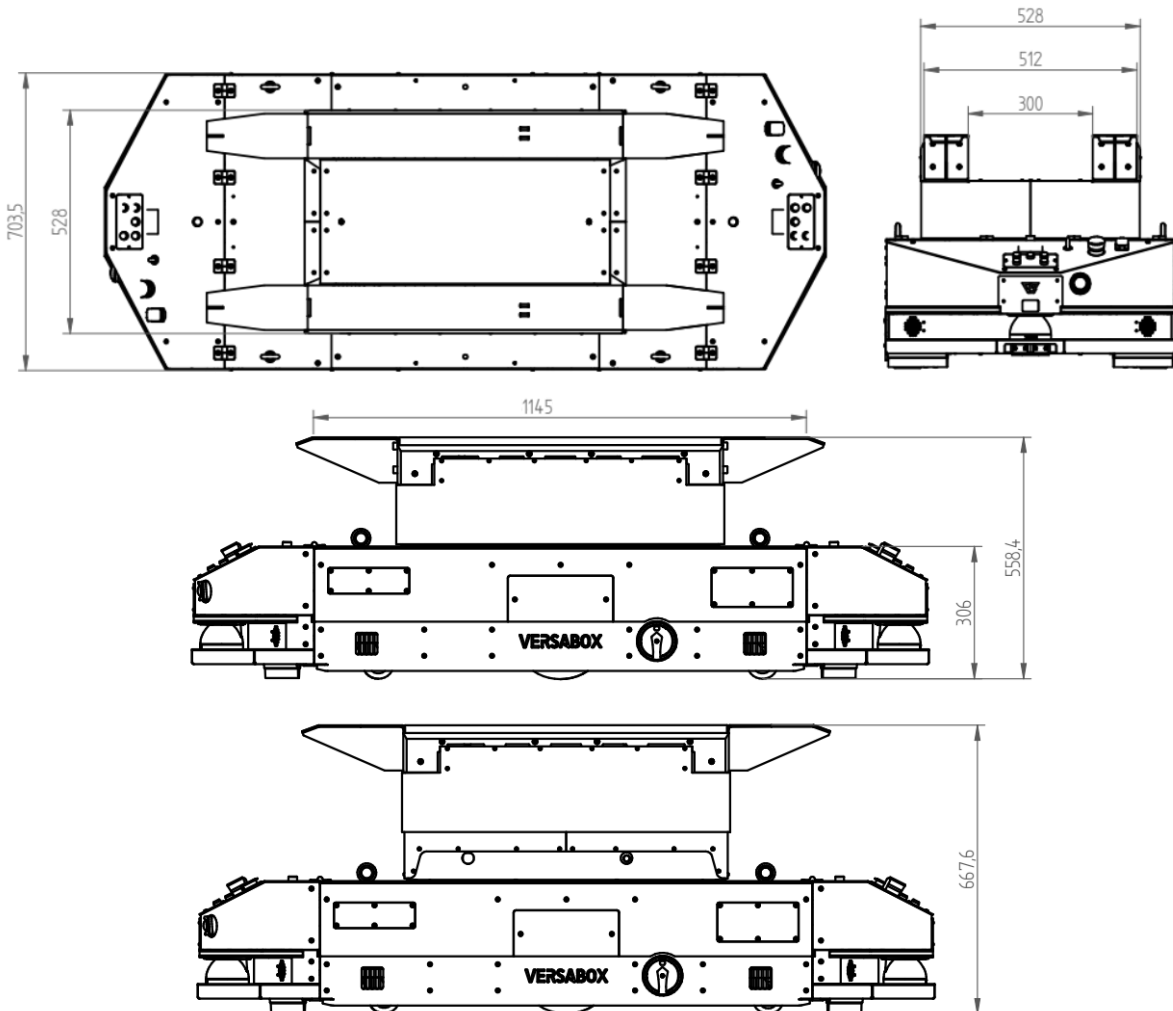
VERSABOT 500 Dimensions (no attachments)
